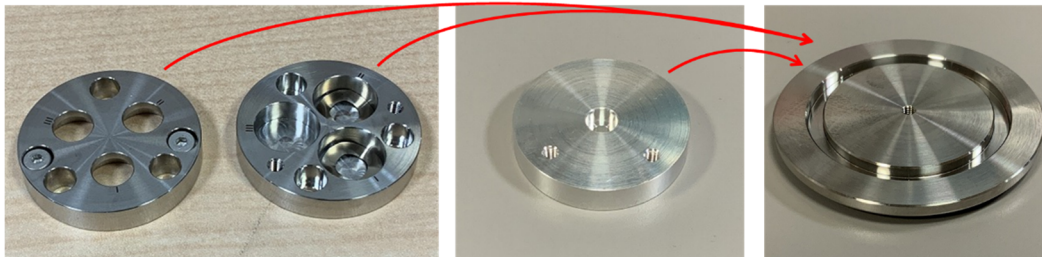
Inner attachment for $\phi 10\text{mm}$ single sample holder
